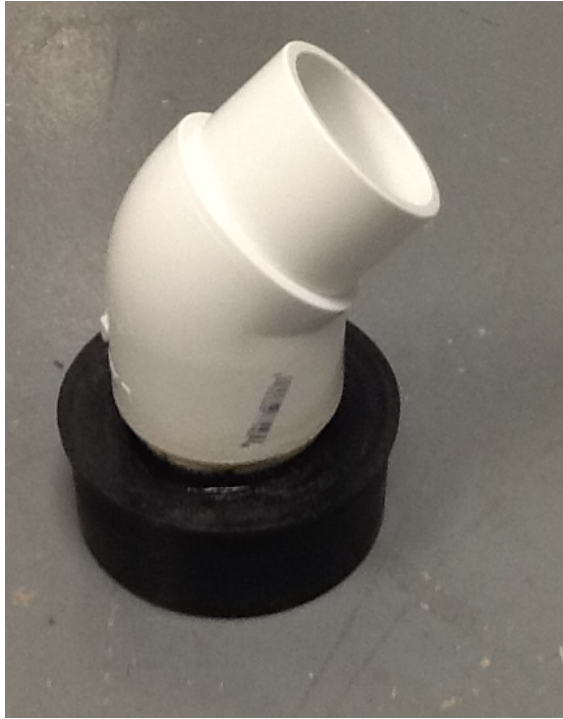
Chamber connector fabrication step 7. The 2" PVC angled connector was glued to the 2" to 4" dust reducer.
